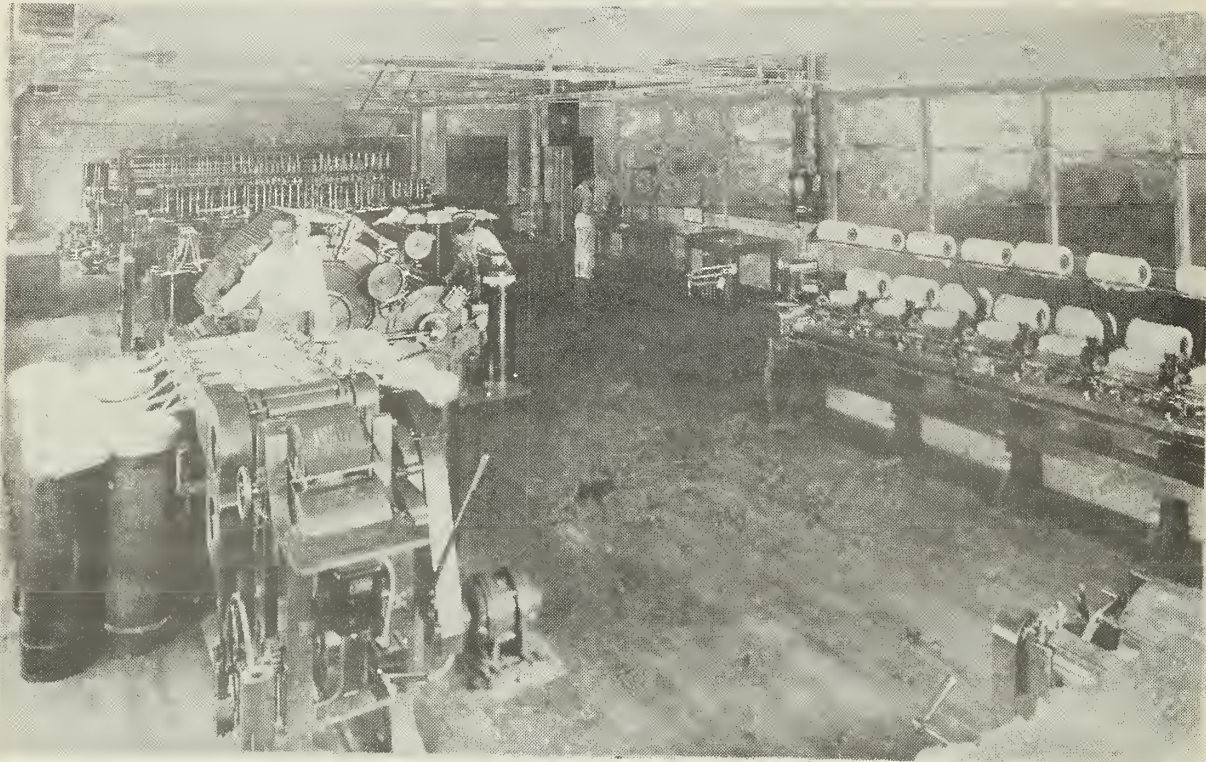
General view of the processing equipment used in the card room at one of the cotton spinning laboratories. Shown on the right is a comber; in the left foreground a sliver lapper; and back of this machine a card, drawing frame, and roving frames.
